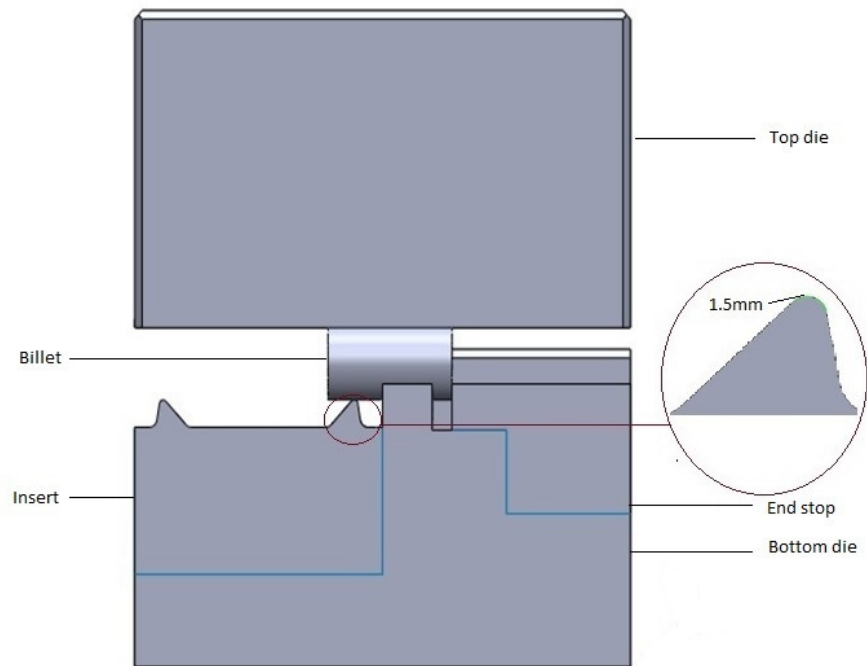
Four Piece die set consisting of Top die, Bottom die, Insert (with fillet radius of 1.5 mm) and End stop
